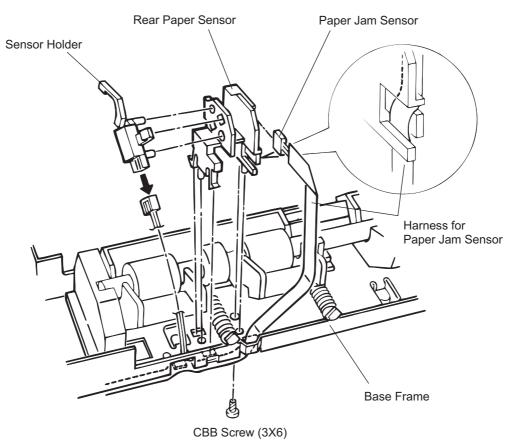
Paper Jam Sensor / Rear Paper Sensor Removal
